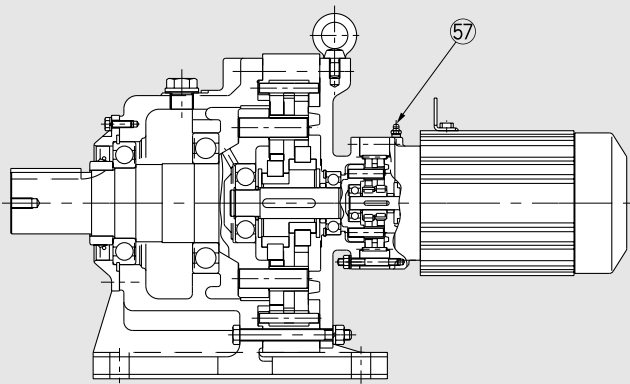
Type CHHM (Horizontal Gearmotor)
